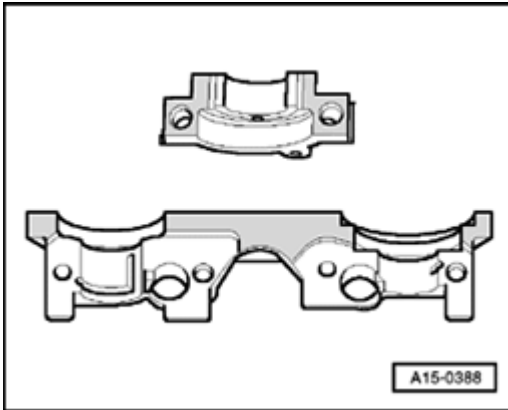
Coating Hatched Surface Of Double Bearing Cap As Well As Outer Bearing Cap Next To Camshaft Adjuster With Sealant
